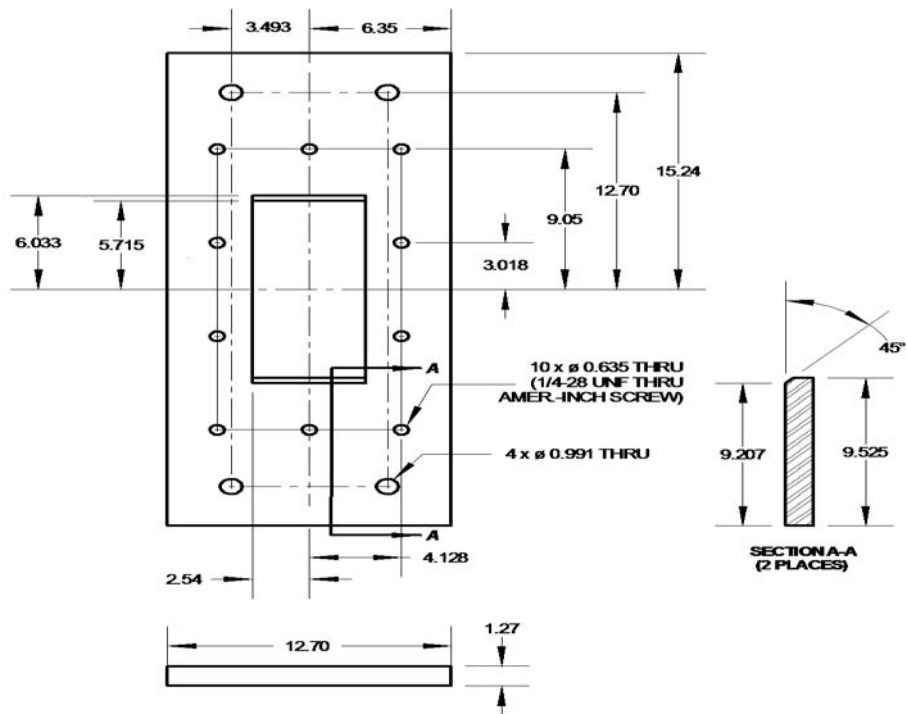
Autosketch Drawing of Beam Fixture Bottom Plate [28]
